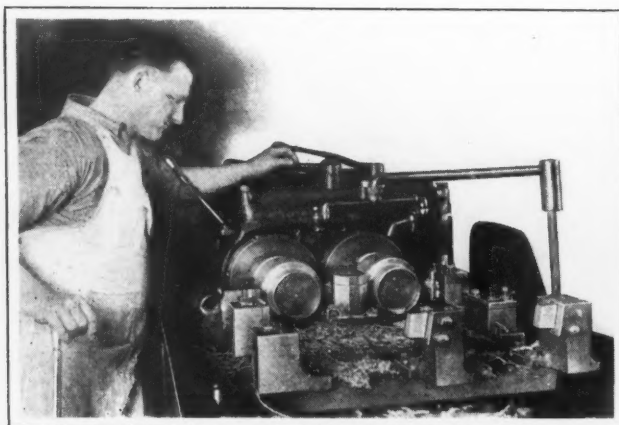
Turning Cylinder Barrels on Double-spindle Turret Lathe
